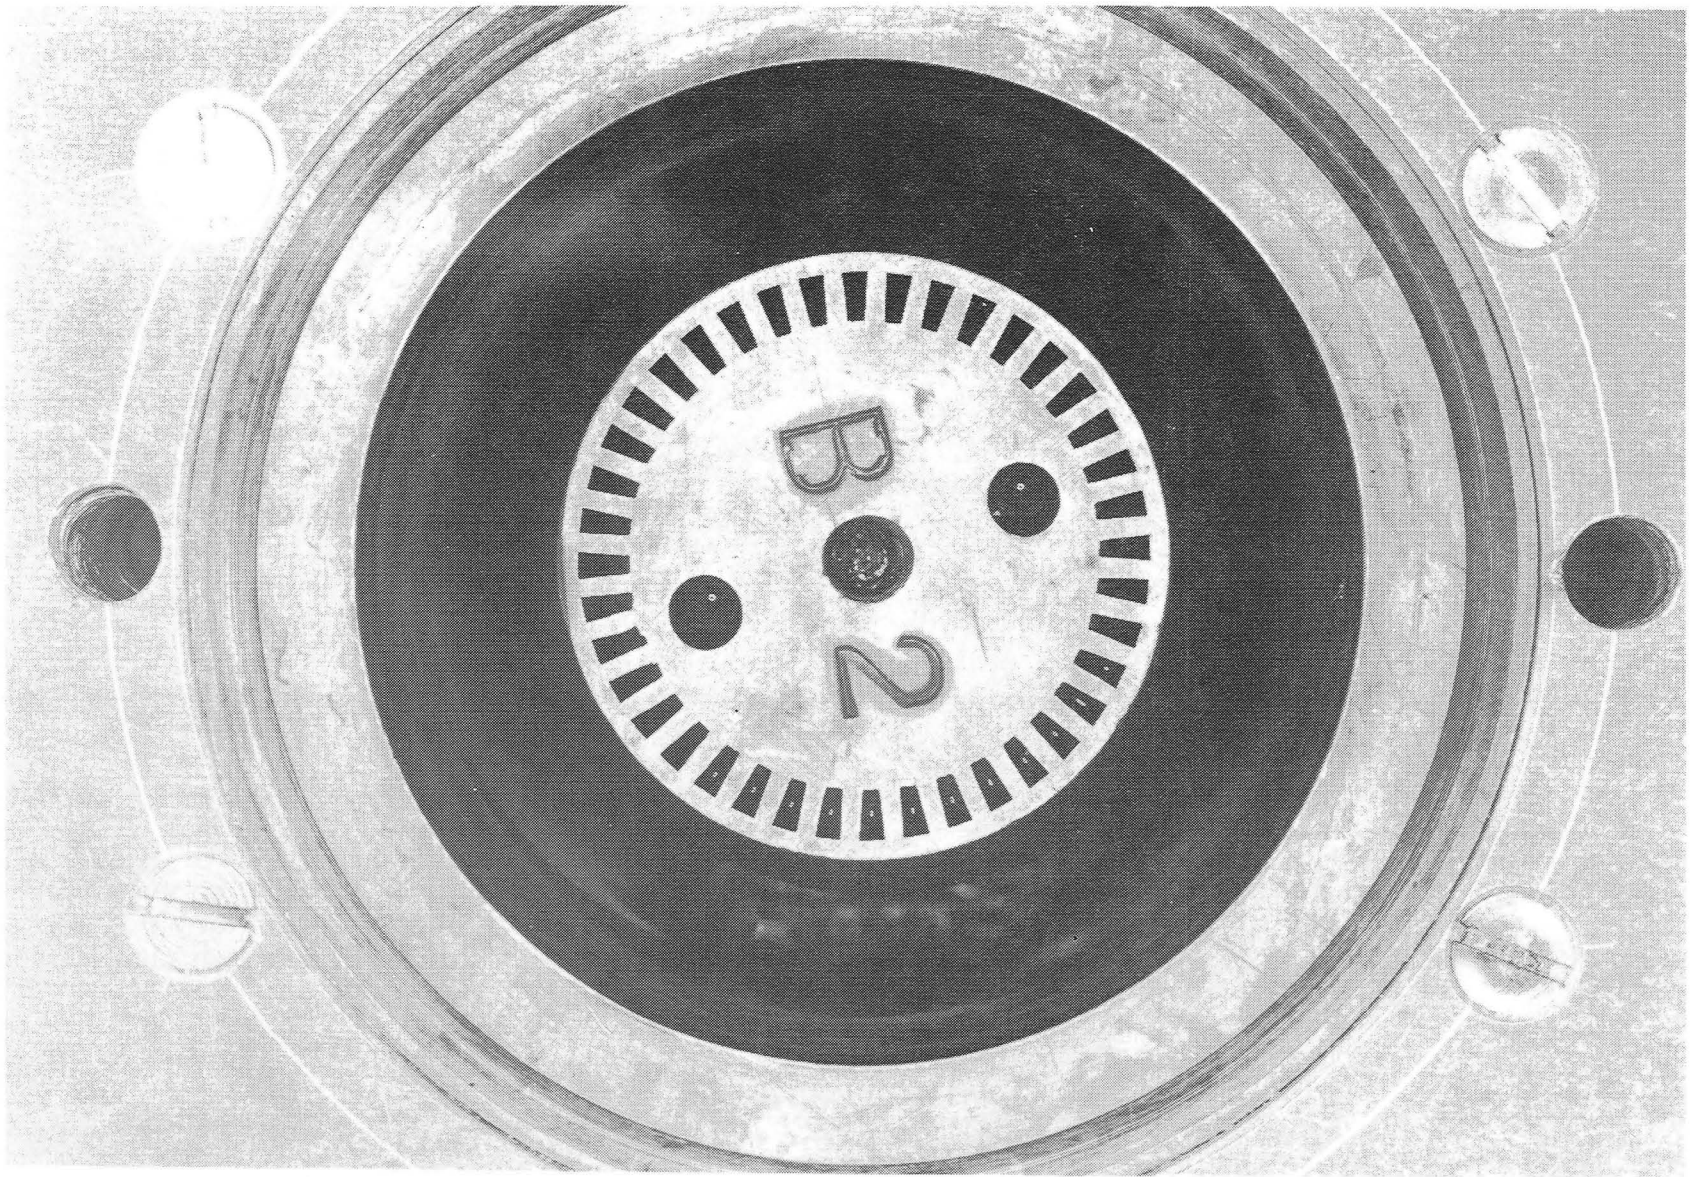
NASA-LeRC Cooled Plug Viewed from Aft End
